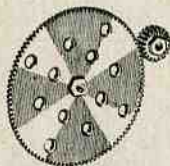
Angle string guide with right angled opposing shafts, which lie in an equal plain.
